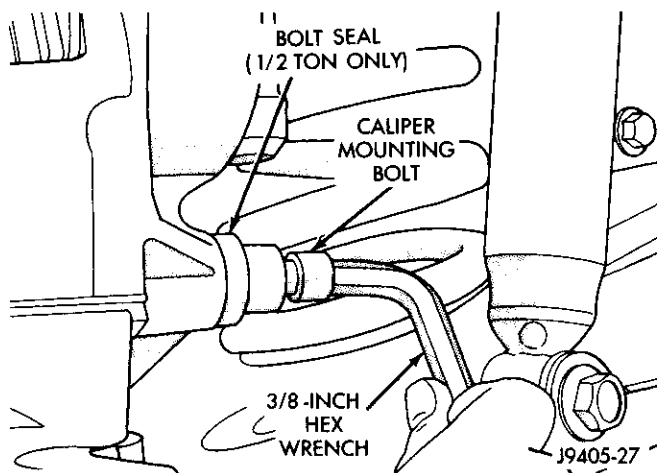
Caliper Mounting Bolt (1/2 Ton)
